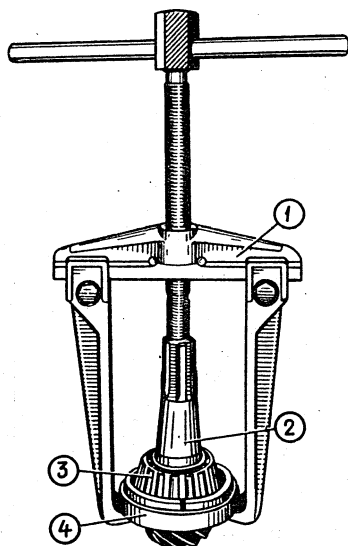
Removing the Drive Pinion Rear Bearing Inner Race:
